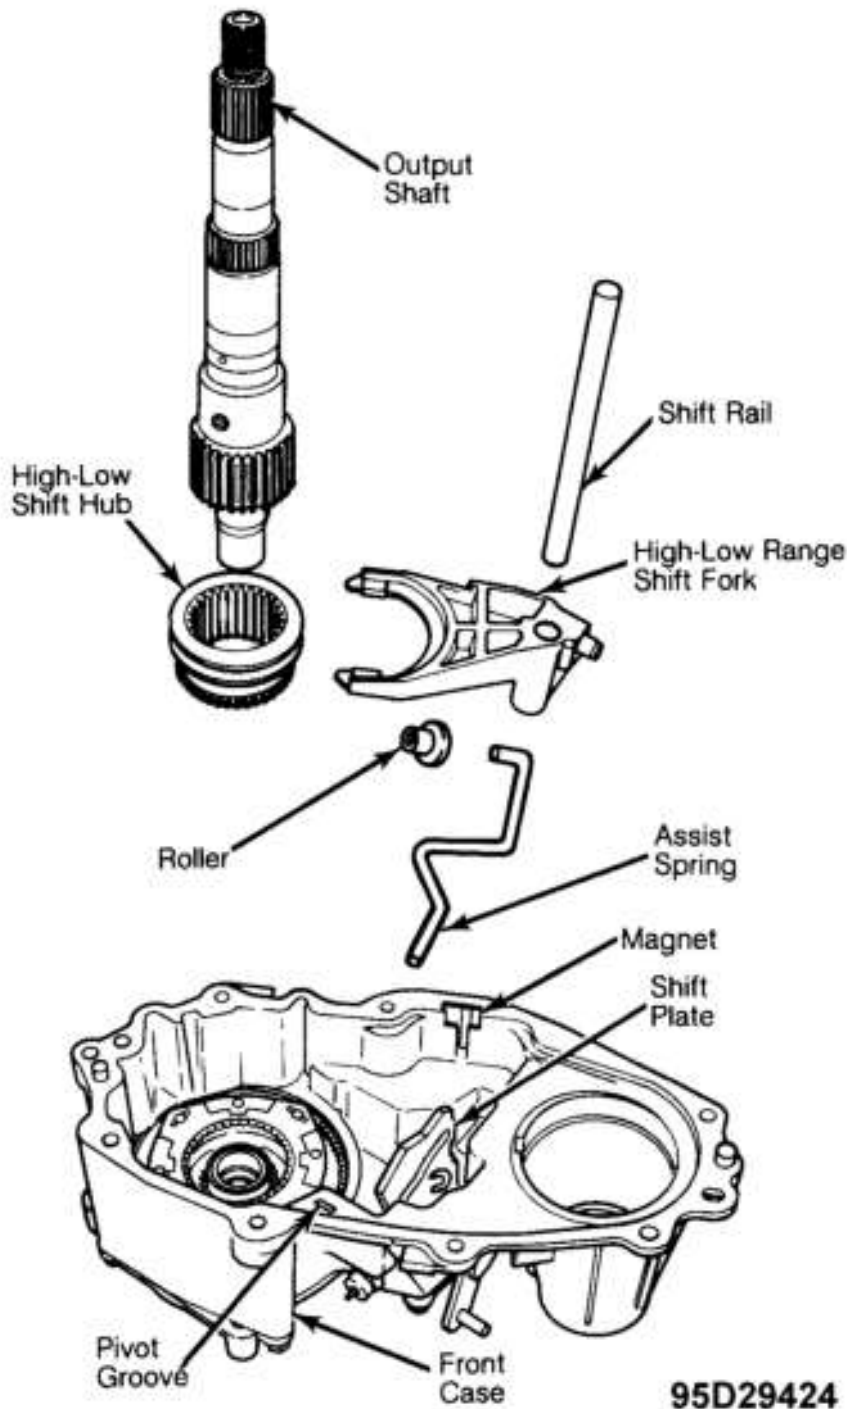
High-Low Range Shift Assembly & Output Shaft (Manual Shift Model Shown; Electronic Shift Model Similar)
